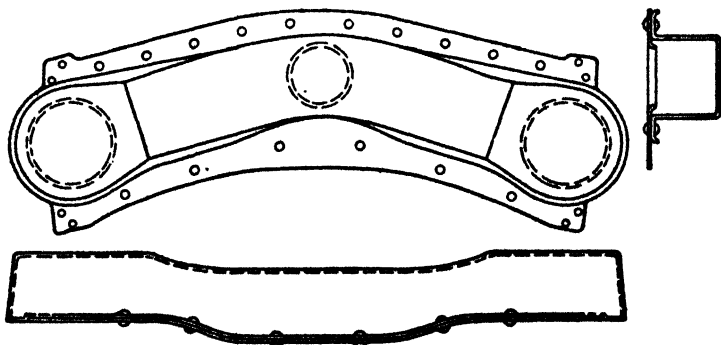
FRONT CROSS MEMBER FOR CAR WITH SUSPENSION ON COIL SPRINGS.
